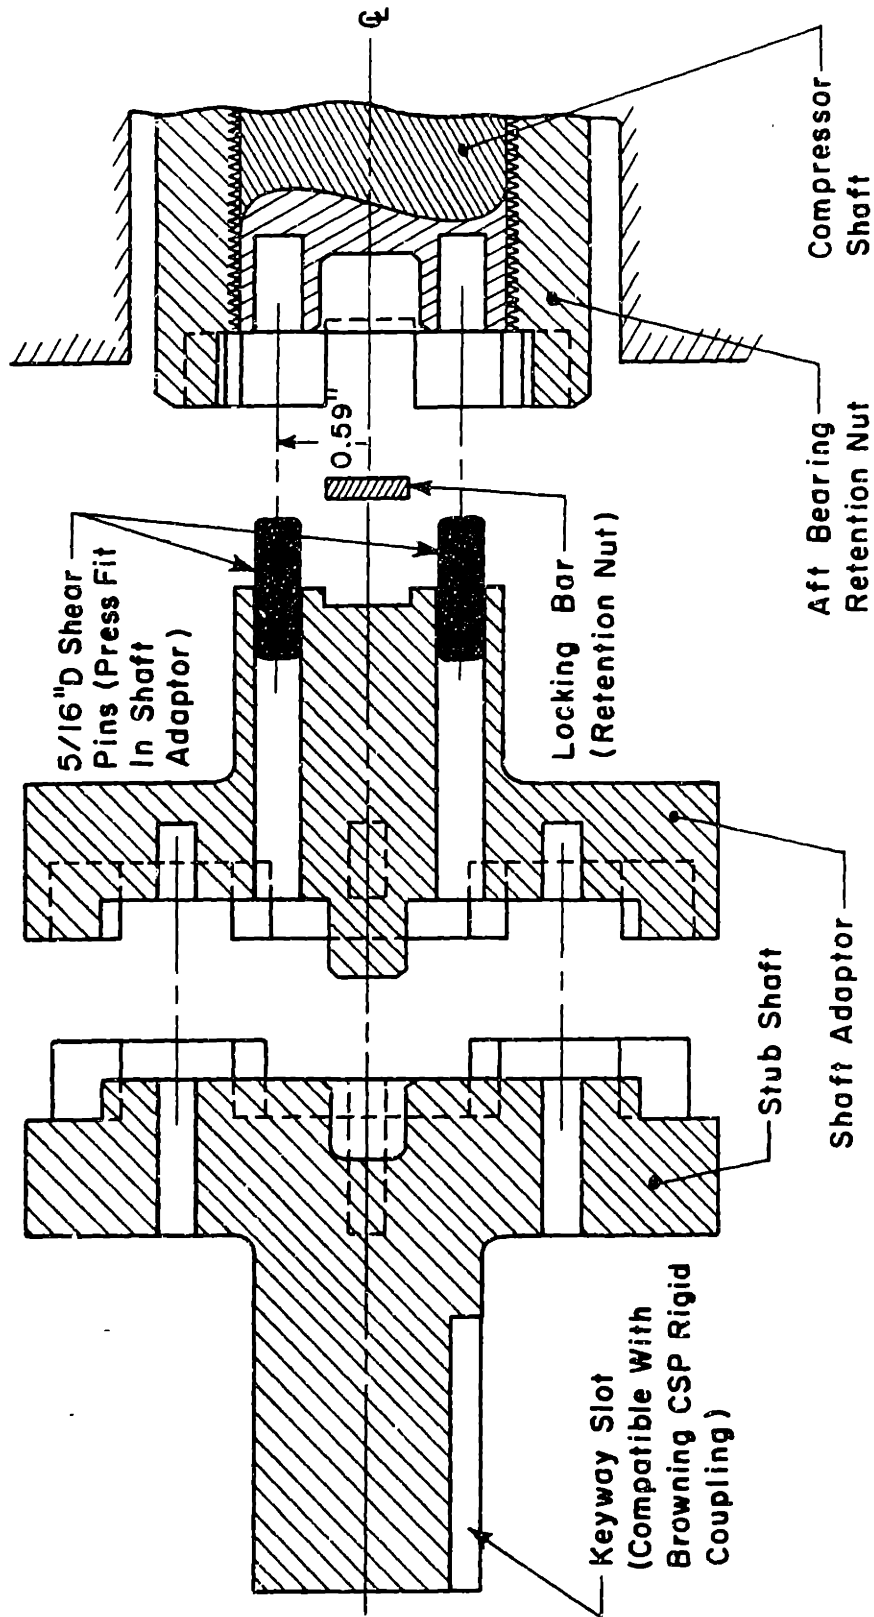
Drive Shaft-Compressor Aft End Rotor Connections
